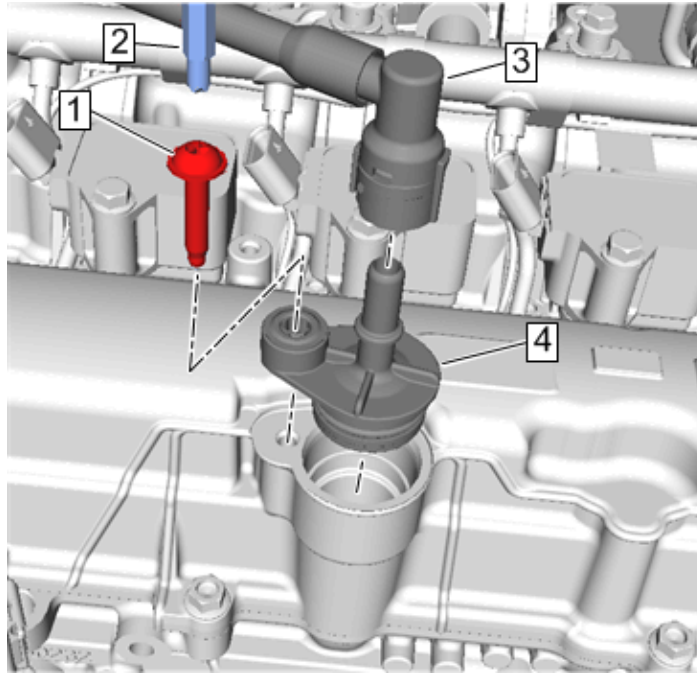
Positive Crankcase Ventilation Valve, Tube, Bolt And Special Tool
